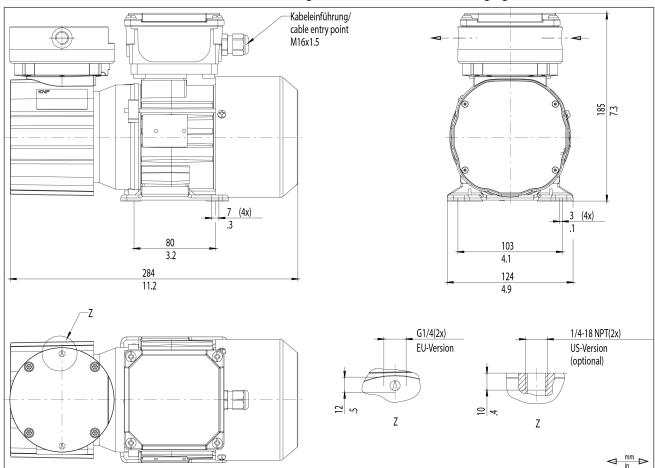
Mounting dimensions N922S_E (three-phase AC motor)
